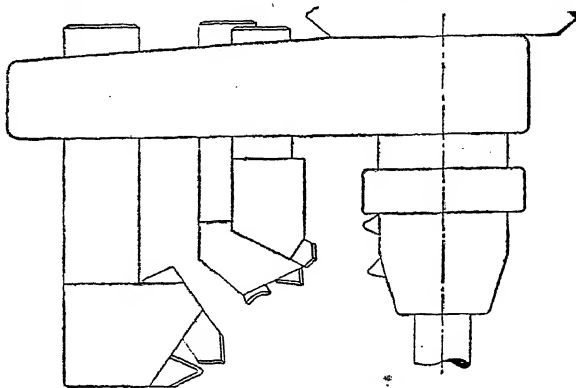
Instance of multi-tool bar layout for turret lathe.
